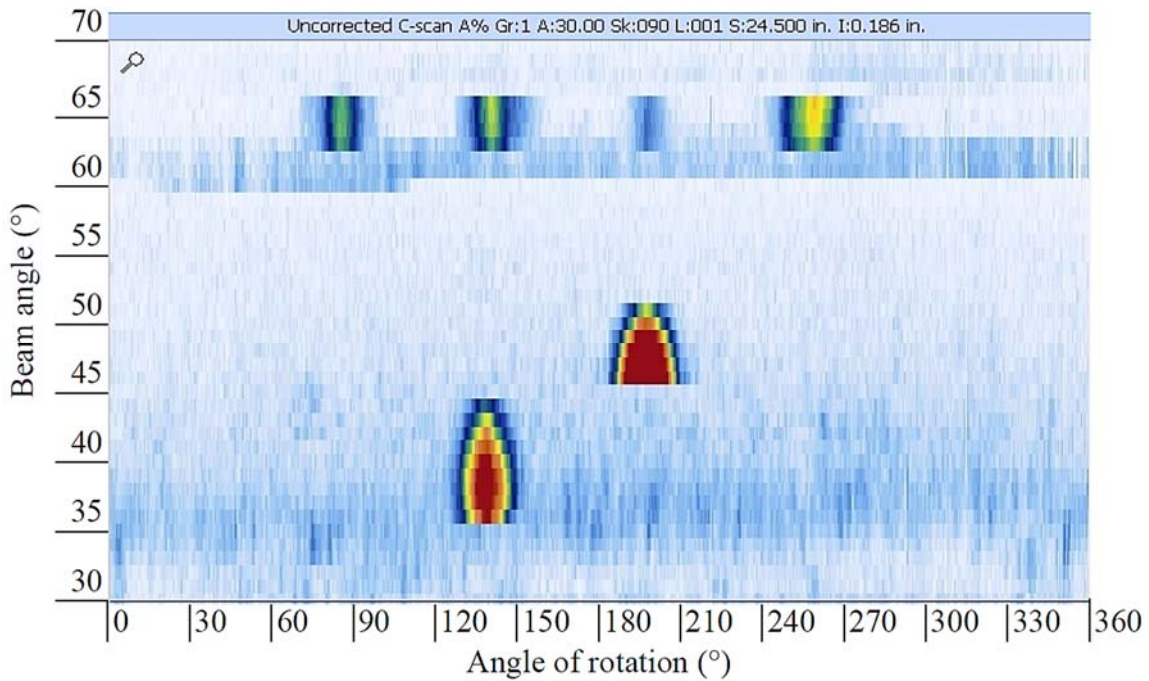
C-scan of a cracked axle (right side of journal) using a chain scanner
